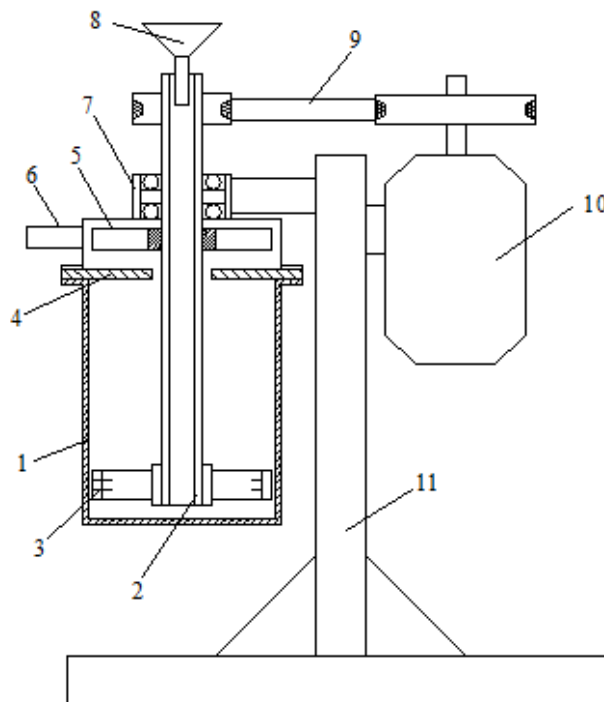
Centrifugal mill: 1 - grinding chamber; 2 - hollow shaft; 3 - working body; 4 – ring for classification; 5 - impeller; 6 - outlet; 7 - bearing assembly; 8 - hopper; 9 - belt drive; 10 - motor; 11 - support column.
